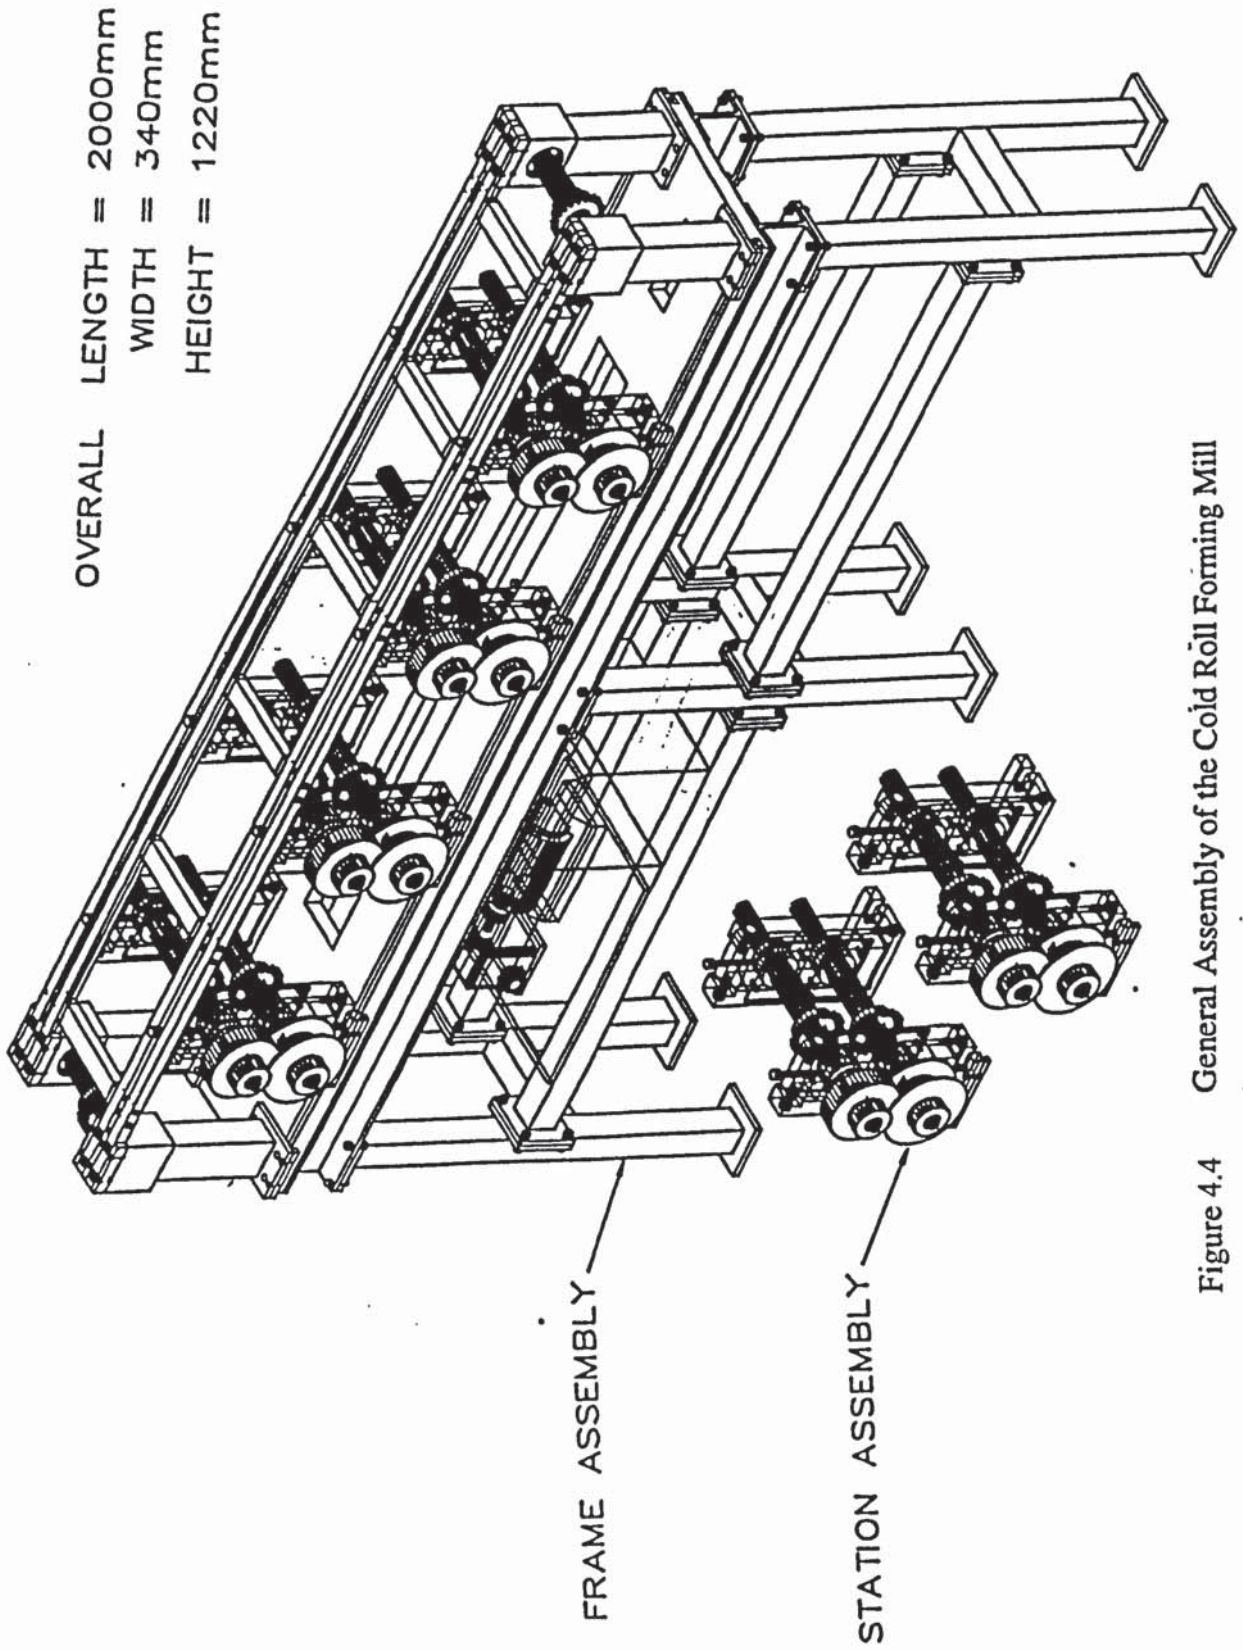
General Assembly of the Cold Roll Forming Mill
